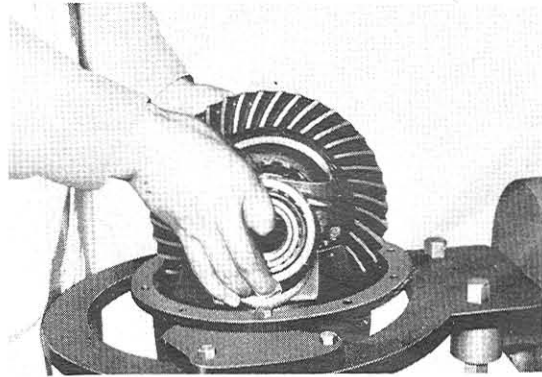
Removing Differ- V5142 ential Case & Bearing
